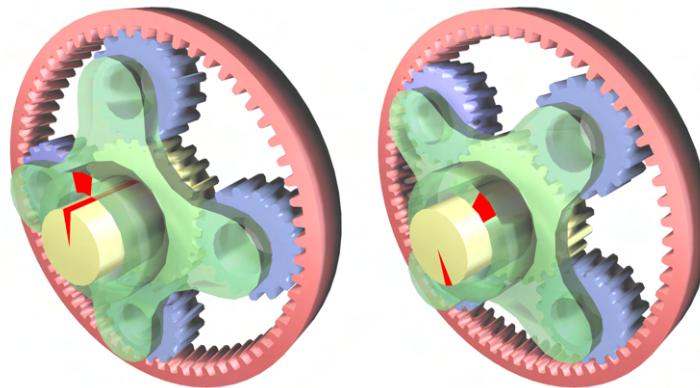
Example Planetary Gearbox Schematic, From [32]
